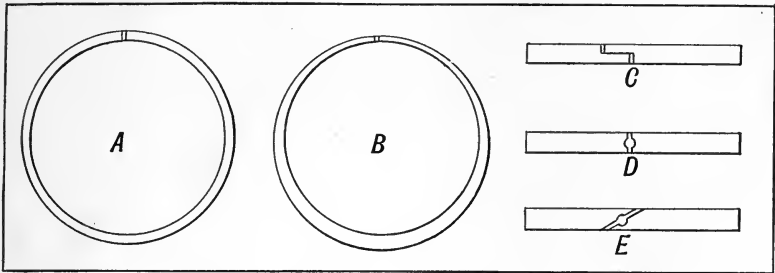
Types of Piston Rings and Ring Joints. A—Concentric Ring. B—Eccentrically Machined Form. C—Lap Joint Ring. D—Butt Joint, Seldom Used. E—Diagonal Cut Member, a Popular Form.
